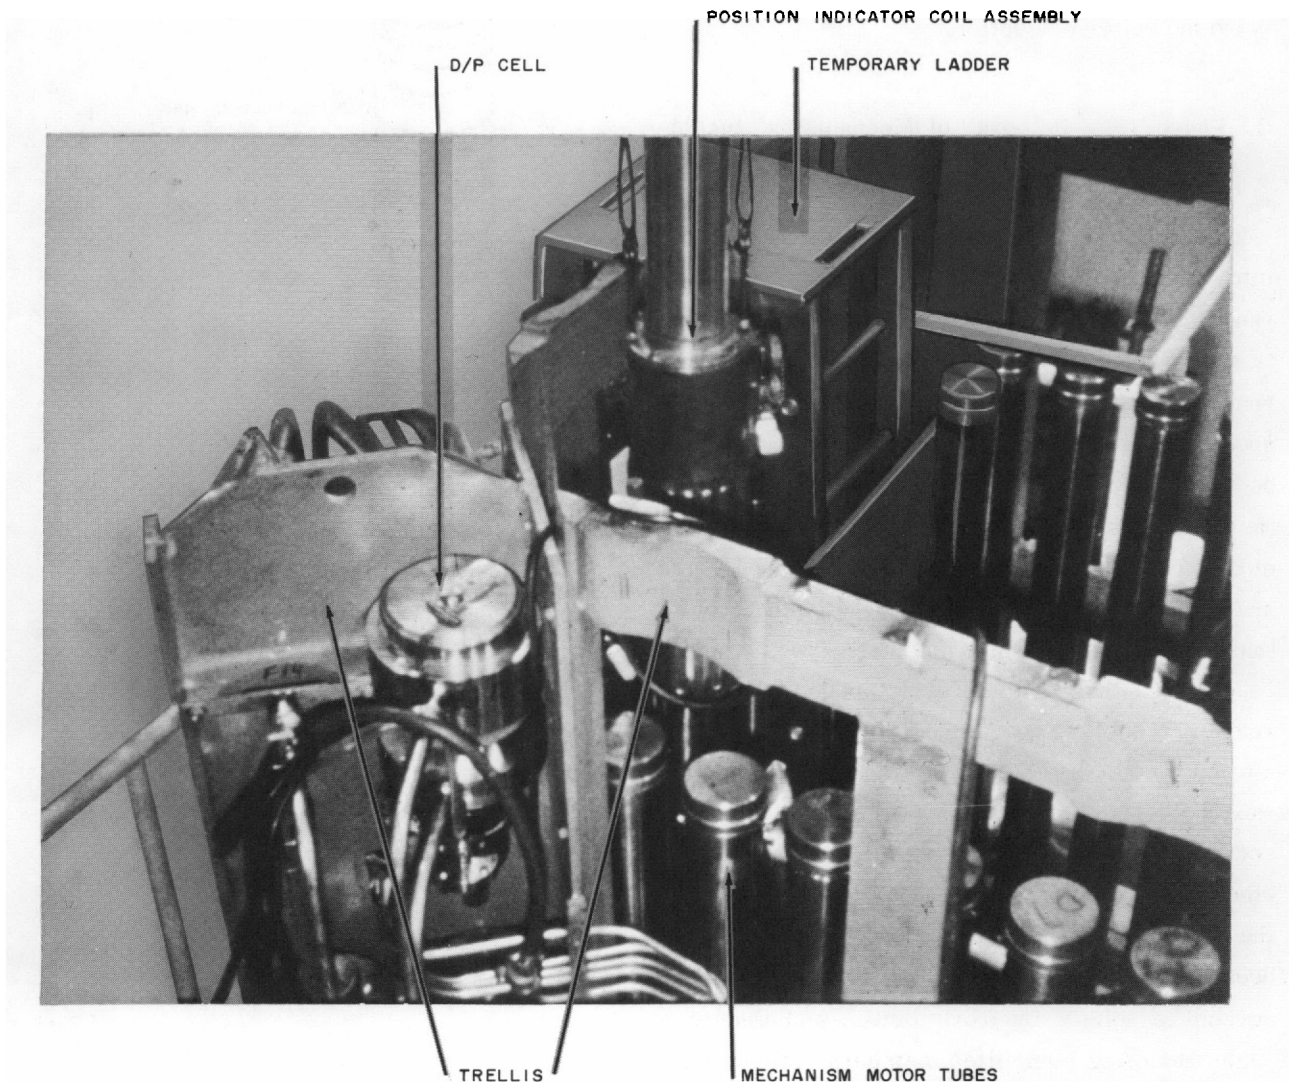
Control Rod Drive Mechanism Stator-Position Indicator Coil Assembly Removal.
